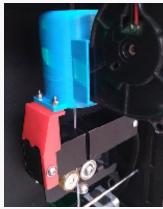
3D printed device mounted for circular cooling, only one fan is then being used
